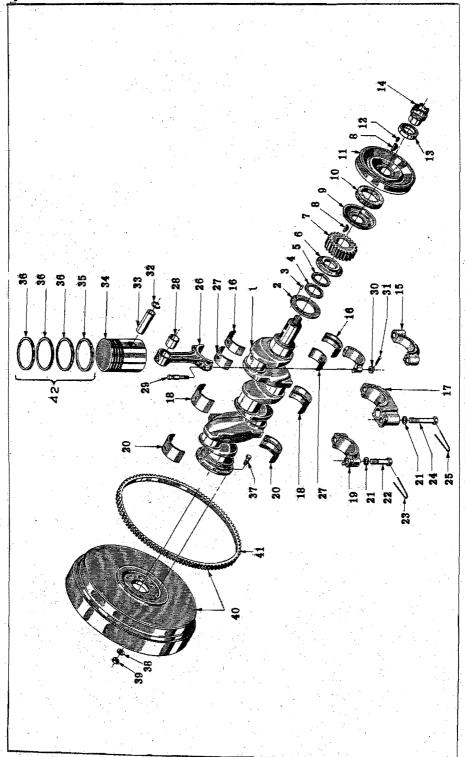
ENGINE PARTS GROUP - INTERNAL VIEW
